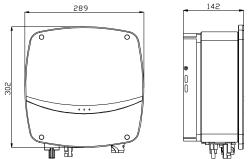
Dimensions of R5-(0.7K-3K)-S1-15
